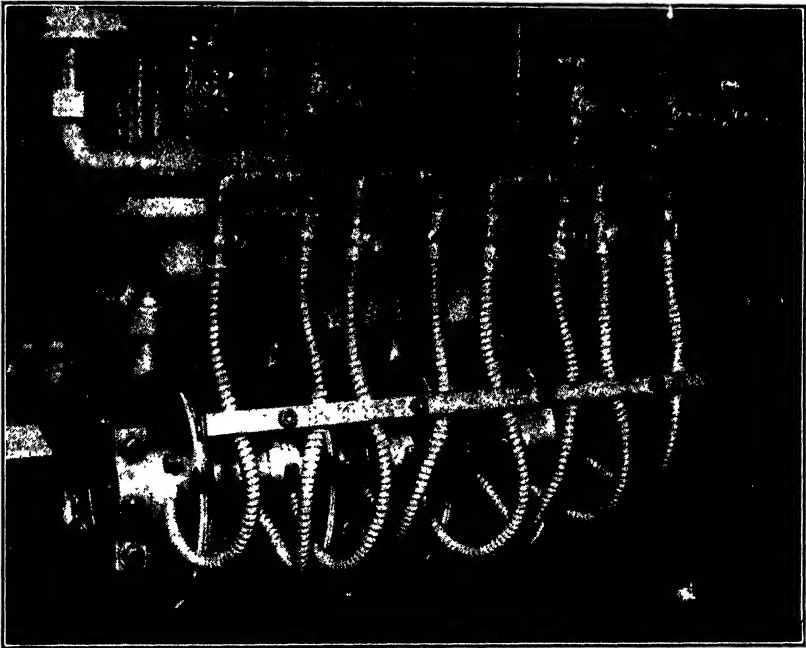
Welding parallel seams in refrigerating machine condenser plates with welder having four wheels.
